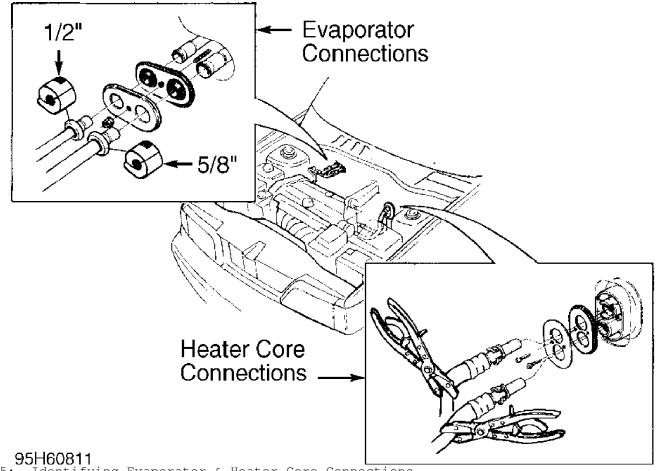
Identifying Evaporator & Heater Core Connections Courtesy of Volvo Cars of North America.
